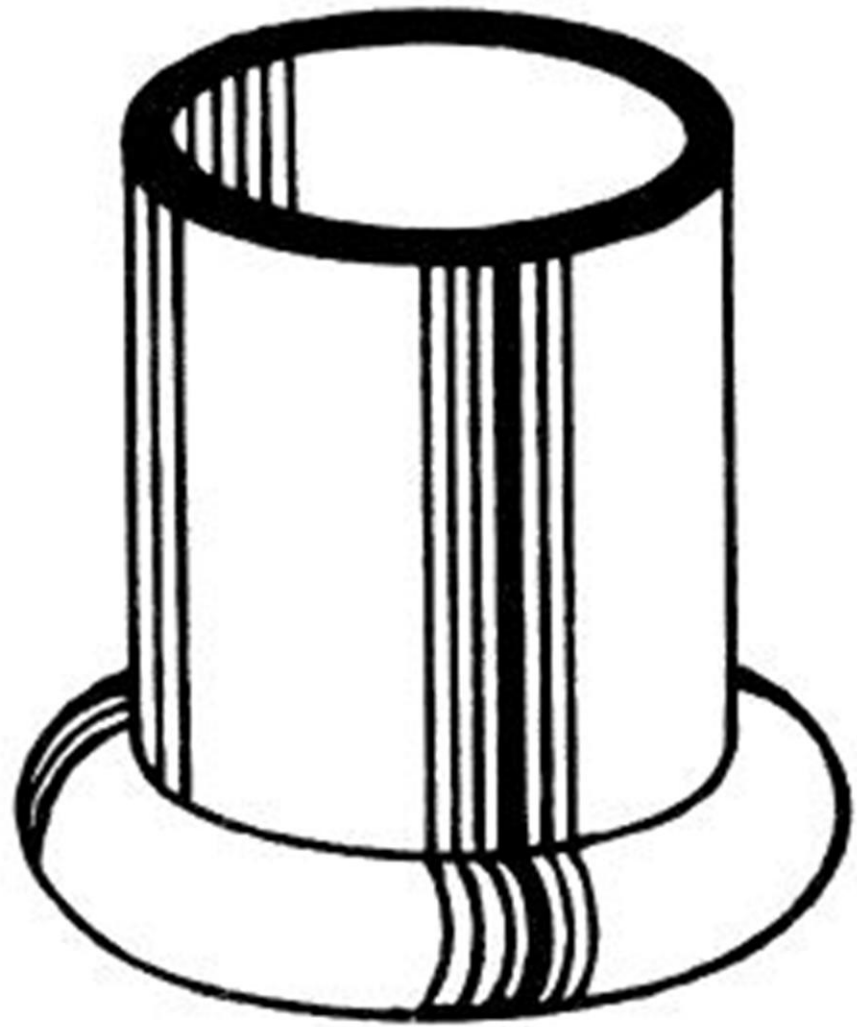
Bulge in this drawn shell produced in bulging die.
